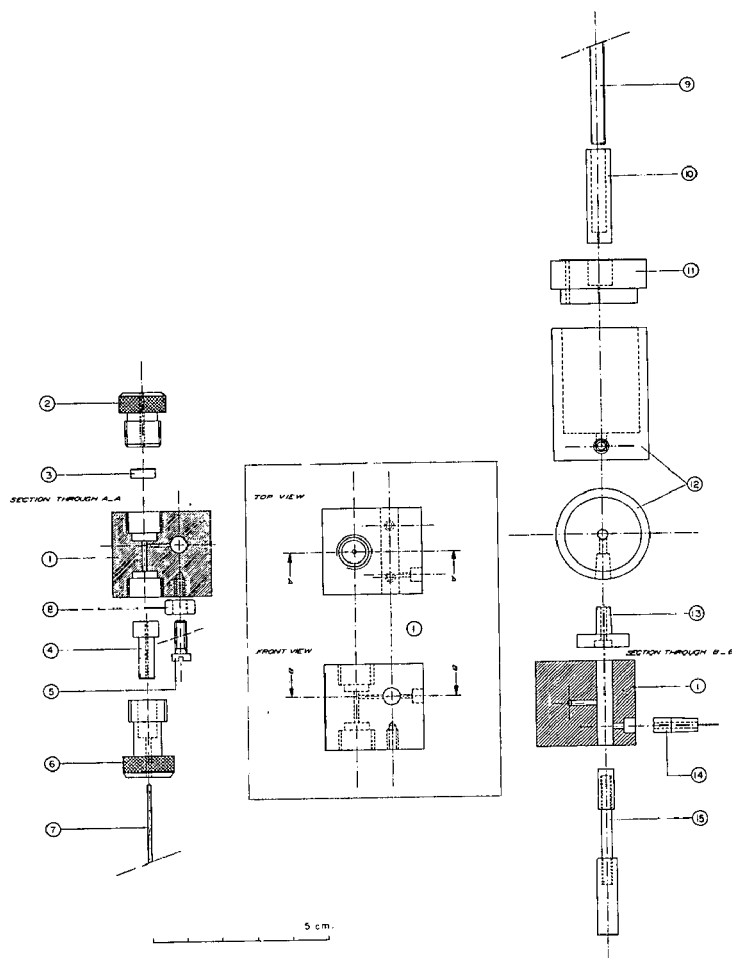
Injection bloc and compartment for the terminal electrolyte. 1 = injection bloc; 2 = bolt for fitting septum; 3 = septum; 4 = piece of perspex for fitting capillary tube; 5 = screw for mounting injection bloc; 6 = bolt for fitting piece 4 and capillary tube; 7 = capillary tube; 8 = rubber O-ring; 9 = high tension cable; 10 = piece of perspex for mounting high tension cable; 11 = cover of electrode compartment; 12 = electrode compartment; 13 = connection of electrode compartment with plunger compartment; 14 = connection towards drain; 15 = teflon-covered plunger.
